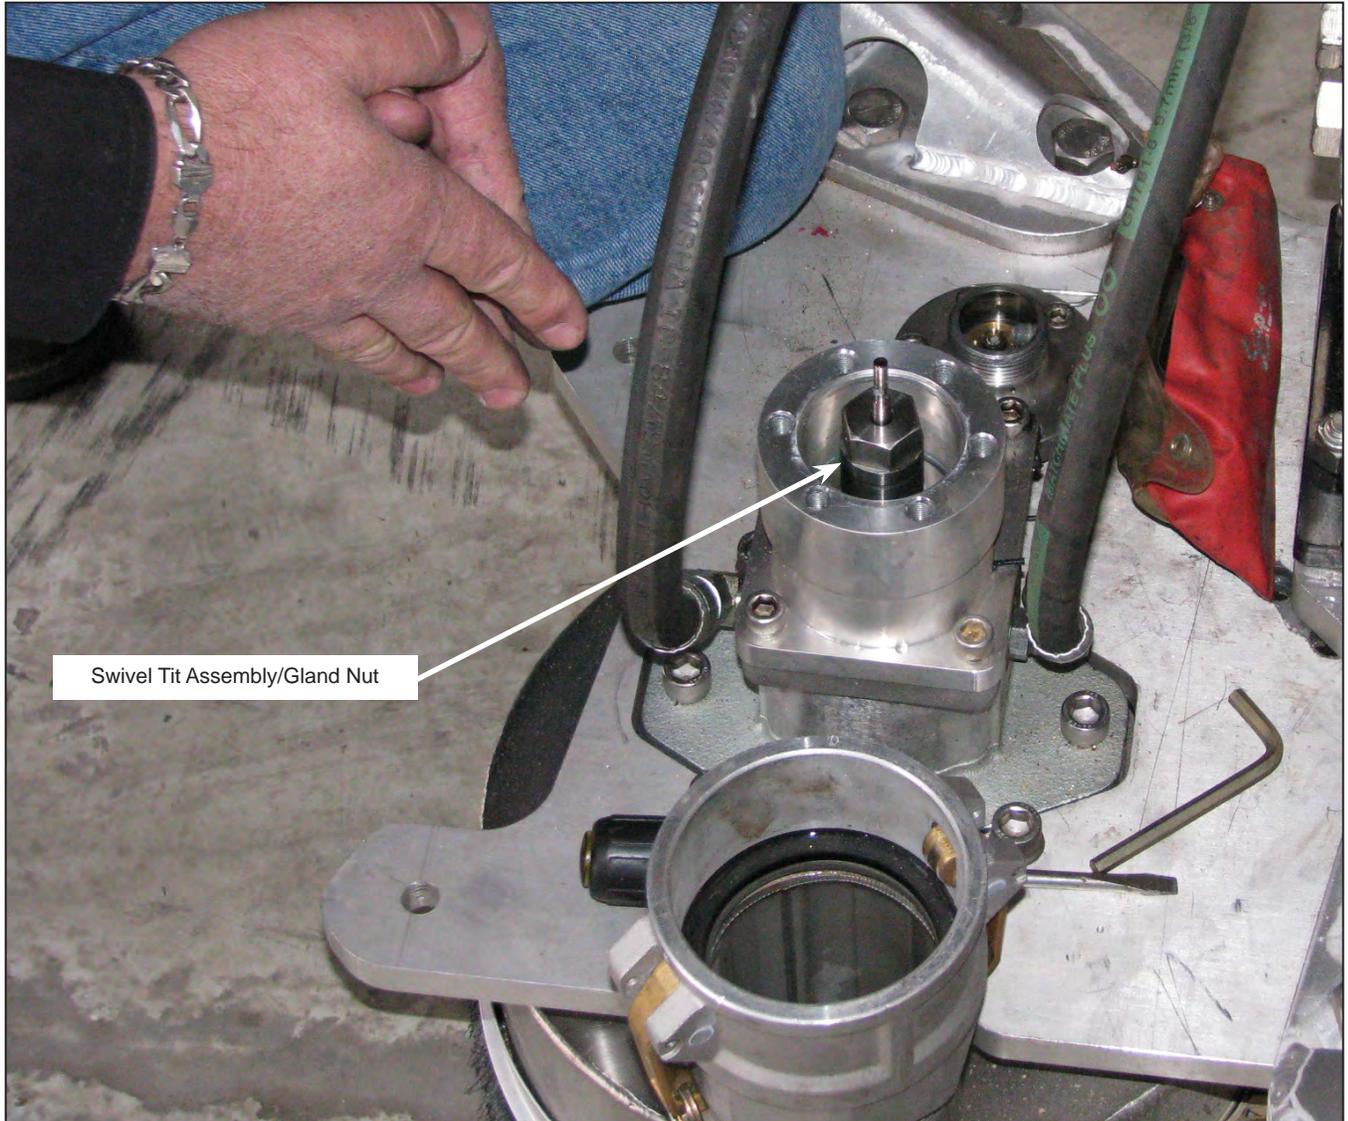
Swivel Tit assembly/gland nut to be removed by turning counterclockwise with a 15/16" deep well socket or box end wrench.
